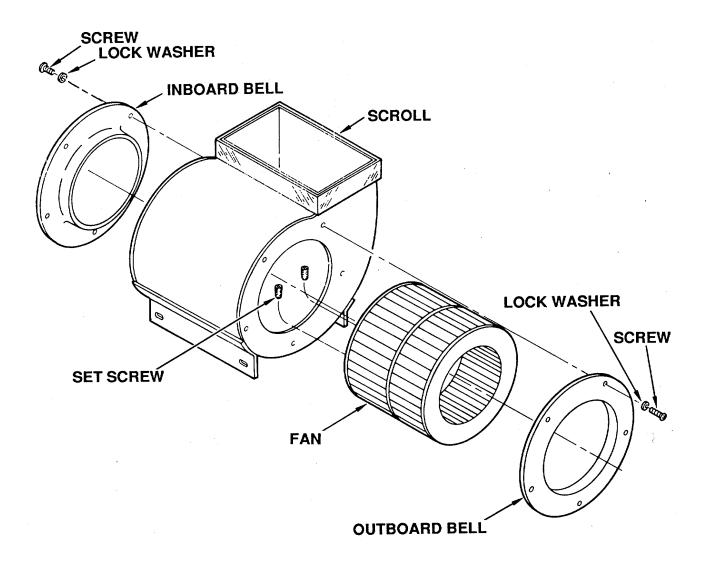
Evaporator Impeller Fans (LH and RH) Removal/Replacement
